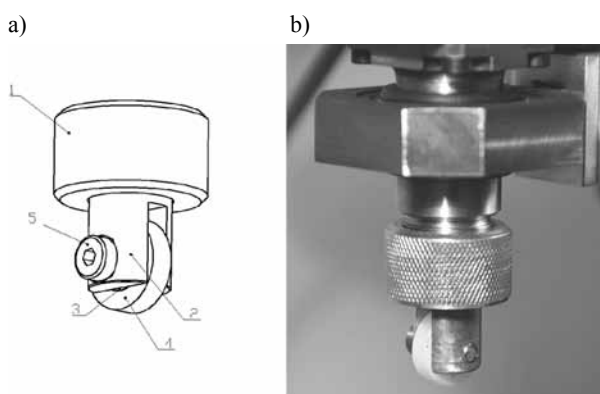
Modified holder for the T-17 test machine which allows tribological tests to be carried out in rolling motion: a) diagram of the holder, b) the holder mounted on the T-17 machine
